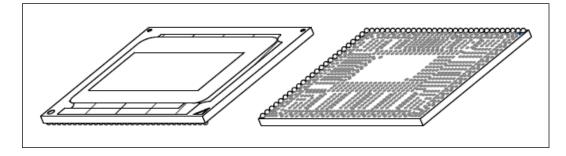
3-D View of Top/ Bottom of rPGA988 2C Package for the 2nd Generation Intel® Core™ Processor Family Mobile
